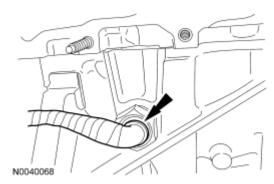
Locating Block Heater Courtesy of FORD MOTOR CO.
